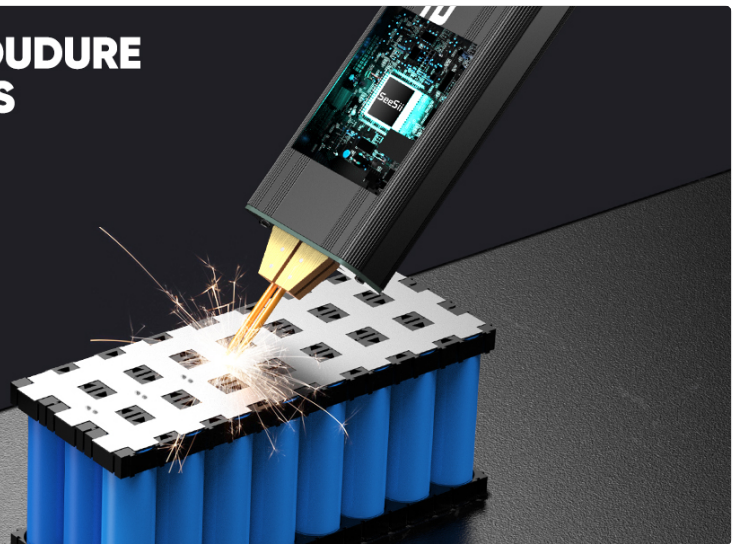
A close-up view of the spot welder in operation, creating a weld on a battery pack.
